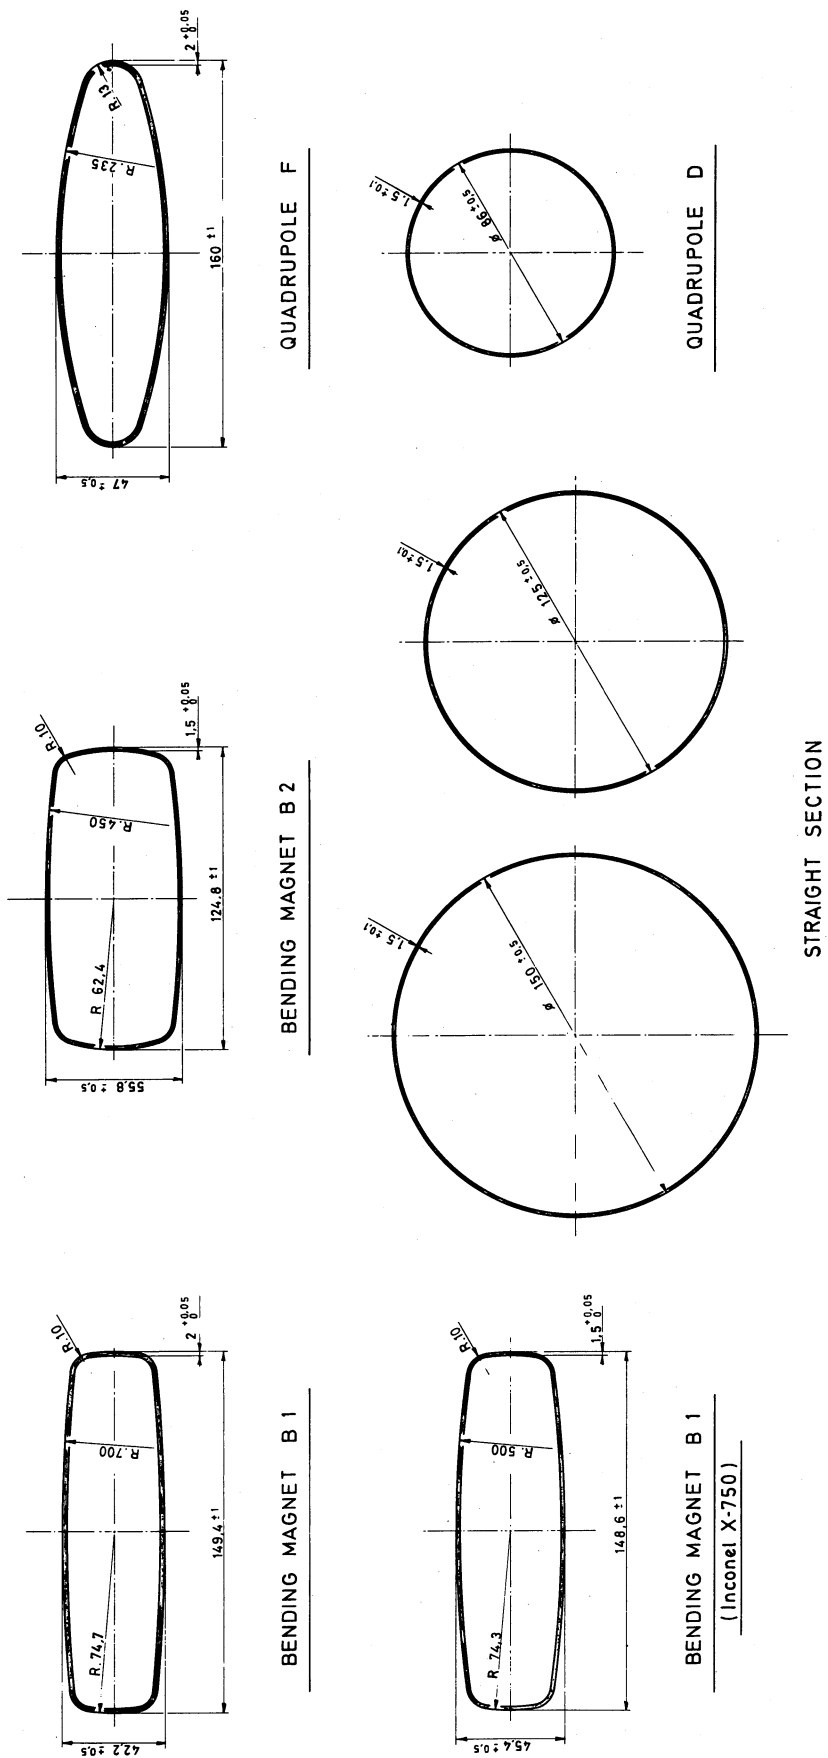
Vacuum chamber cross-sections (tentative designs for bending magnets, focusing magnets and certain straight sections).
